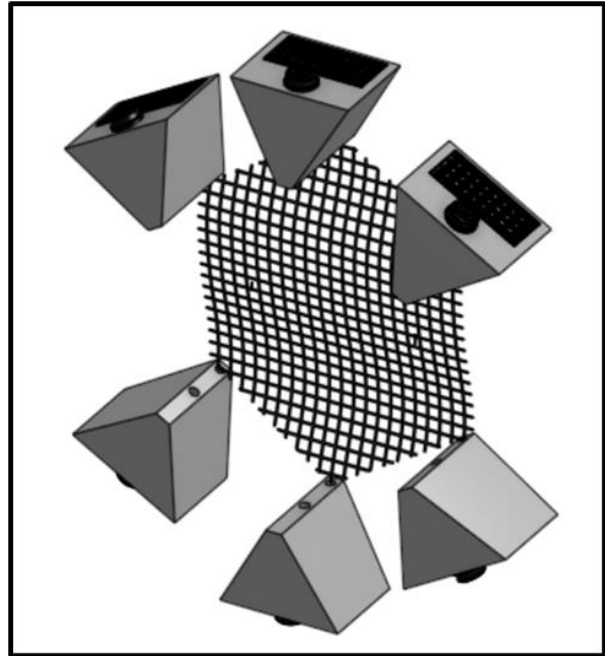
Final design CAD model with wedges separated and net deployed [9].
